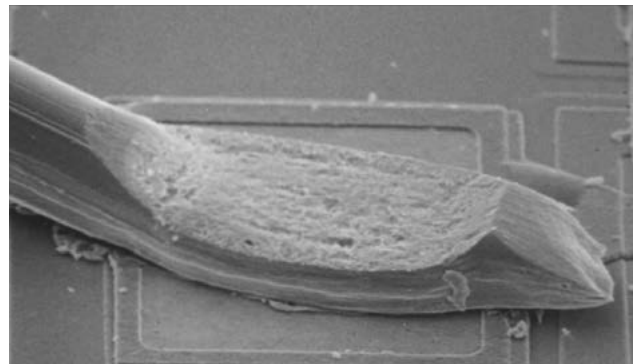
Example of die bond made by the wedge part number 2160-2525-L-PBR-PFR, a polished front and back radius wedge
